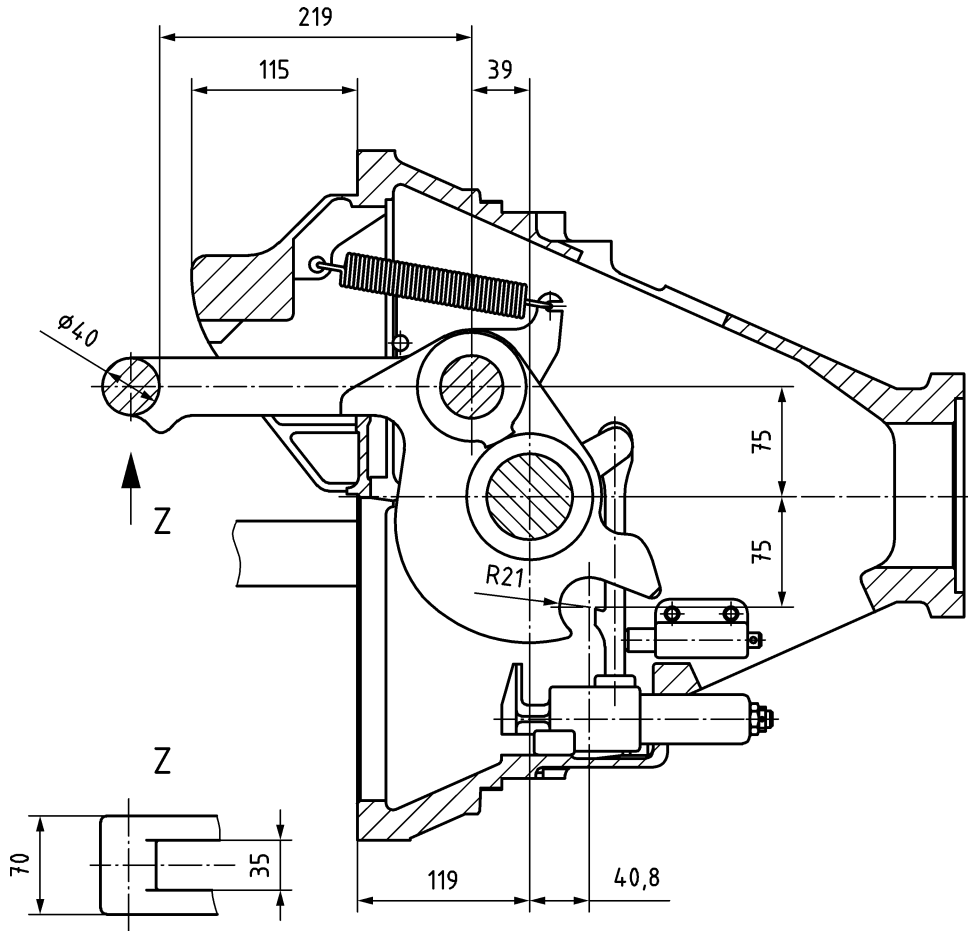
Automatic coupler head in the coupled position (cross section)
